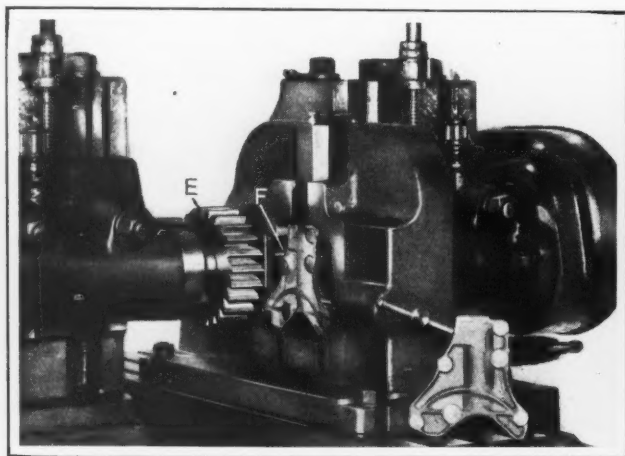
Automatic Duplex Machine Equipped for Milling Bosses on Work Shown in Fig. 8
